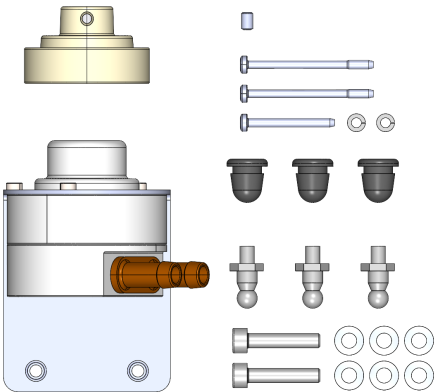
Gear pump FPE (art. no. 3461096)
